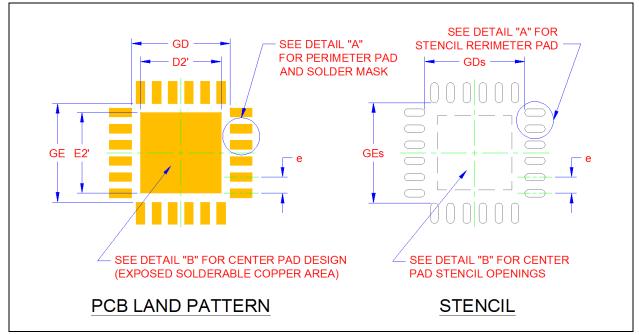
CAP1188 PCB Land Pattern and Stencil - 24-Pin QFN 4mm x 4mm
